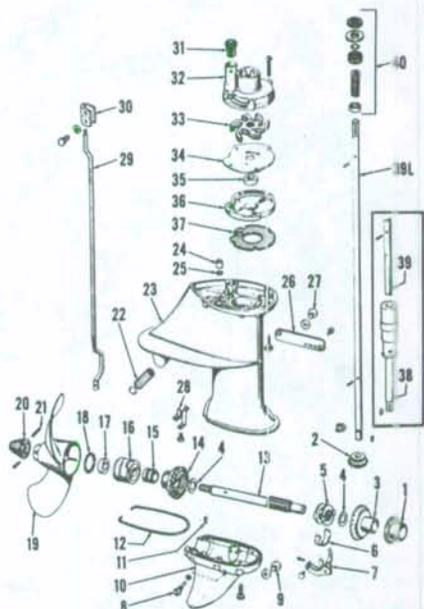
Exploded view of lower unit gearcase, water pump and associated parts used on 6 hp models.
